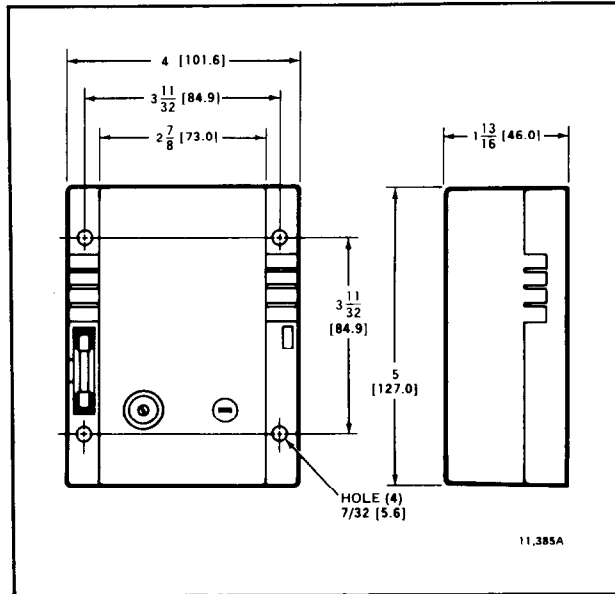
DIMENSIONS FOR S87 IN in. [mm IN BRACKETS].
